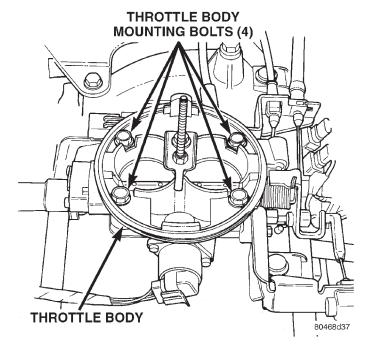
Throttle Body Mounting Bolts—5.2L Engine—Typical
